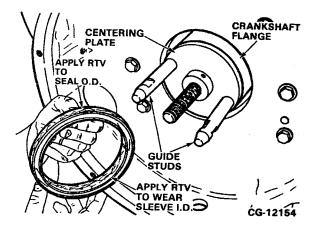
Install Centering Plate and apply R.T.V. to Seal and Sleeve
